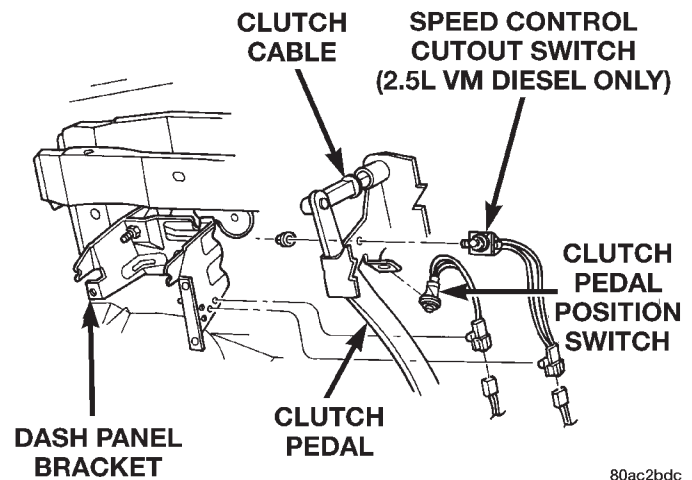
Clutch Pedal Position Switch and Components — LHD Shown
